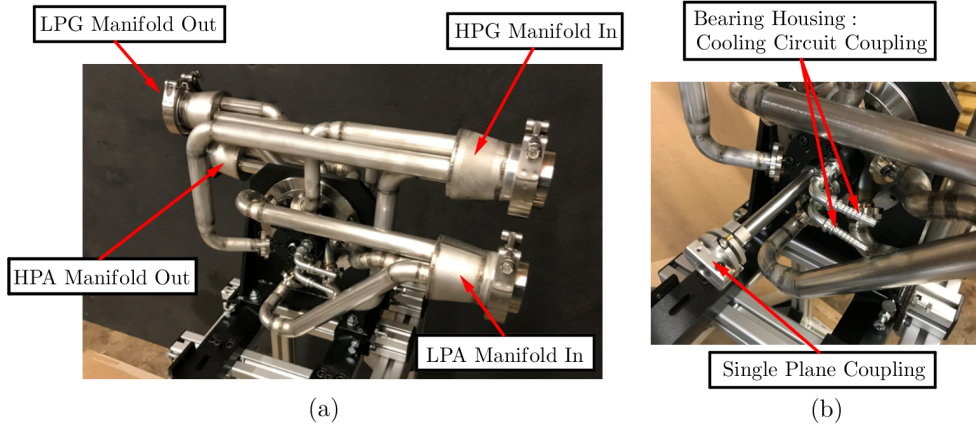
(a) Assembled wave rotor machine with in- and outlet manifolds. (b) Couplings for bearing housing water cooling circuit and single-plane coupling to link wave rotor with load cell.
